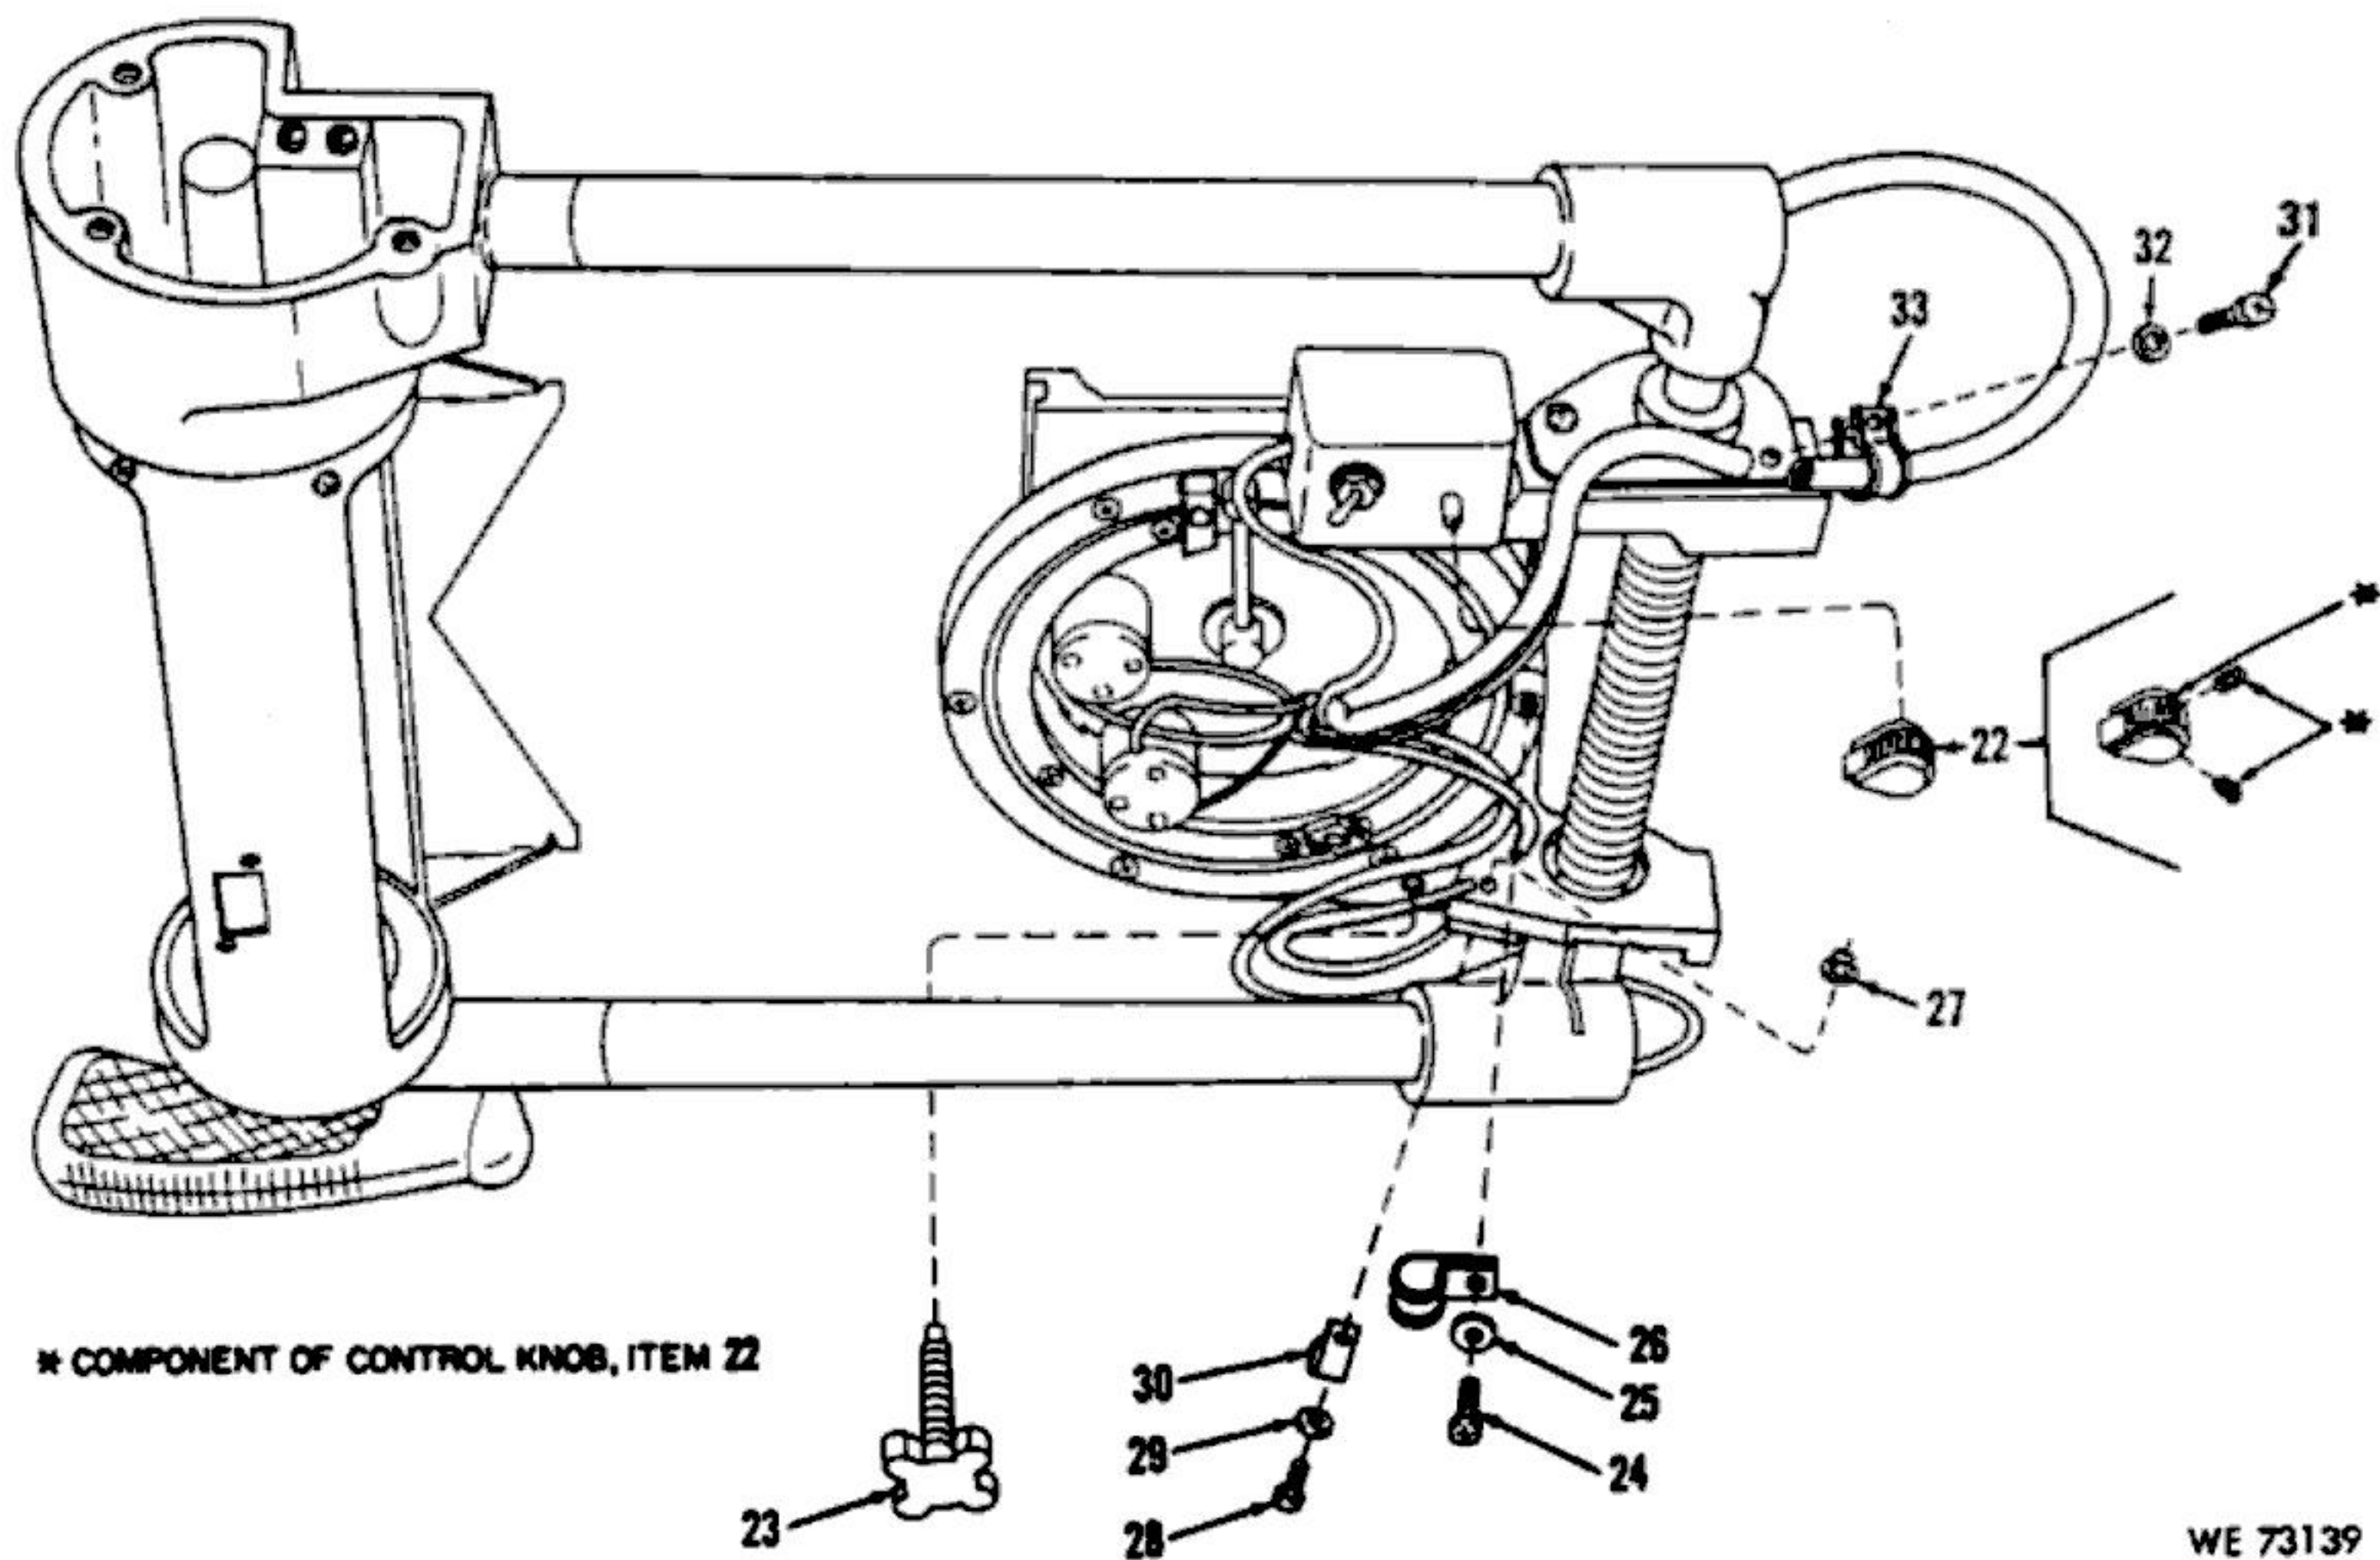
Hand control sight assembly—partially exploded view (sheet 1 of 3).
